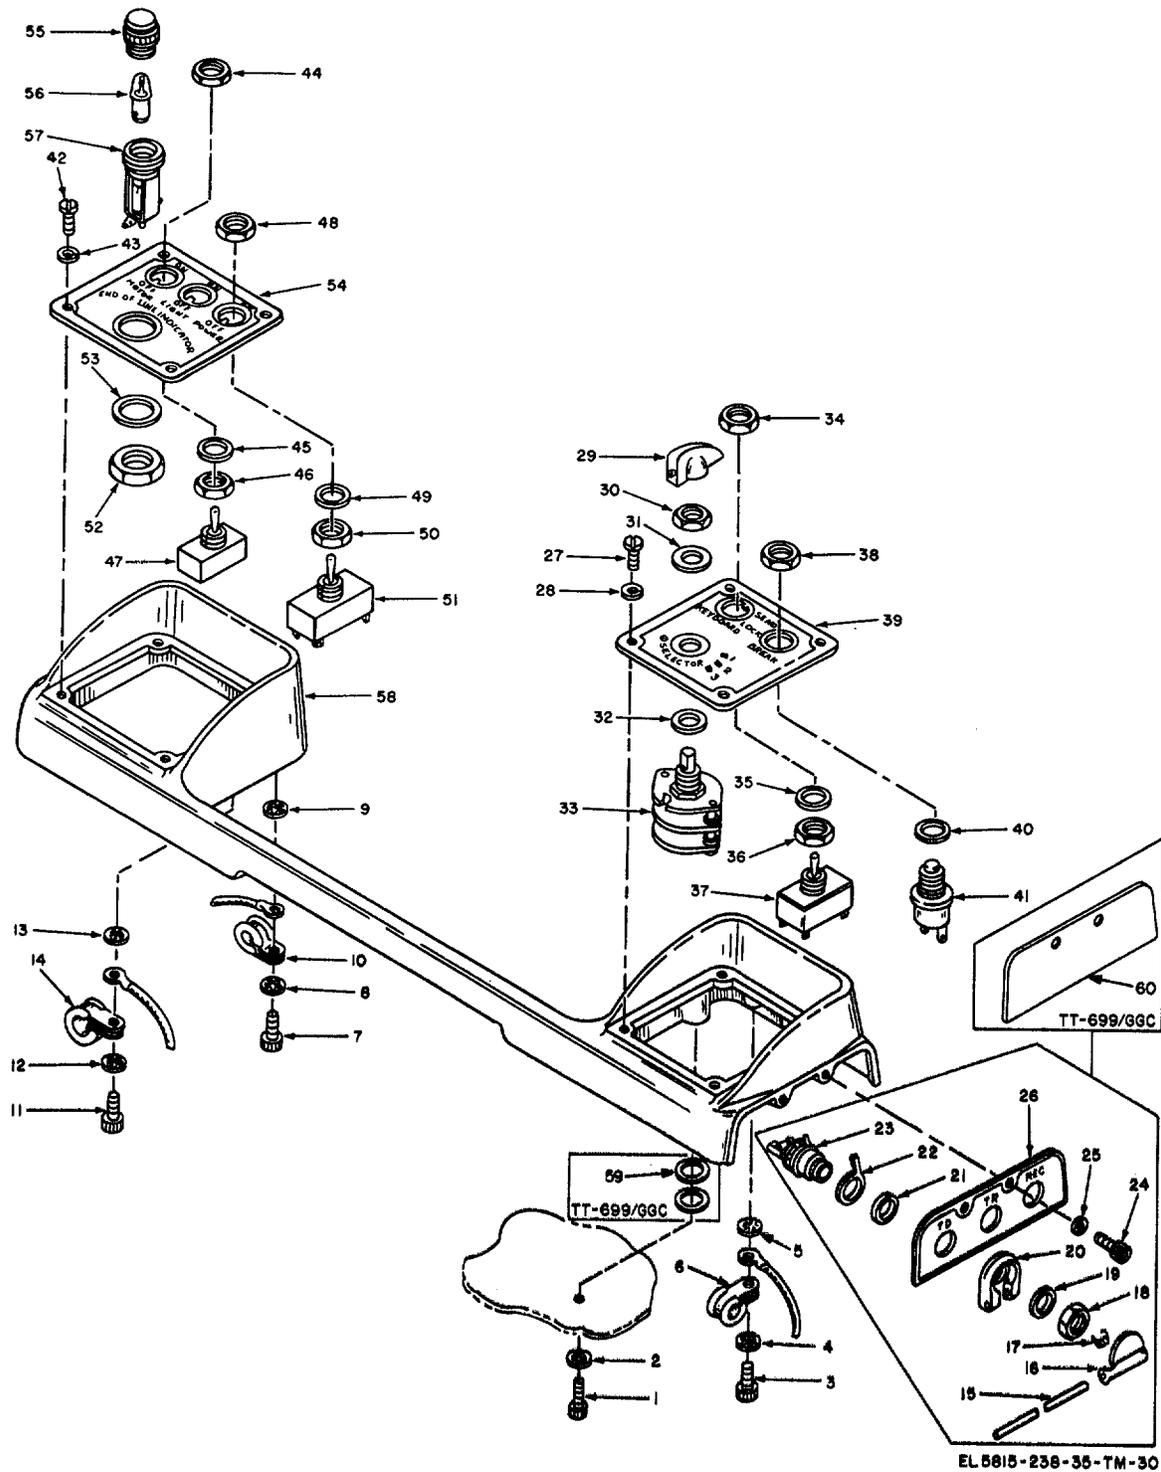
Keyboard guard assembly, exploded view (TT-76/GGC and TT-699/GGC).
